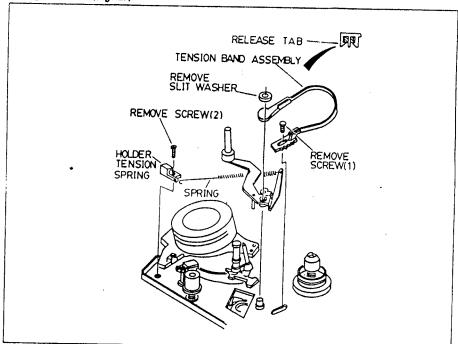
Arm Tension Assembly, Tension Band Assembly and Holder Tension Spring Removal
